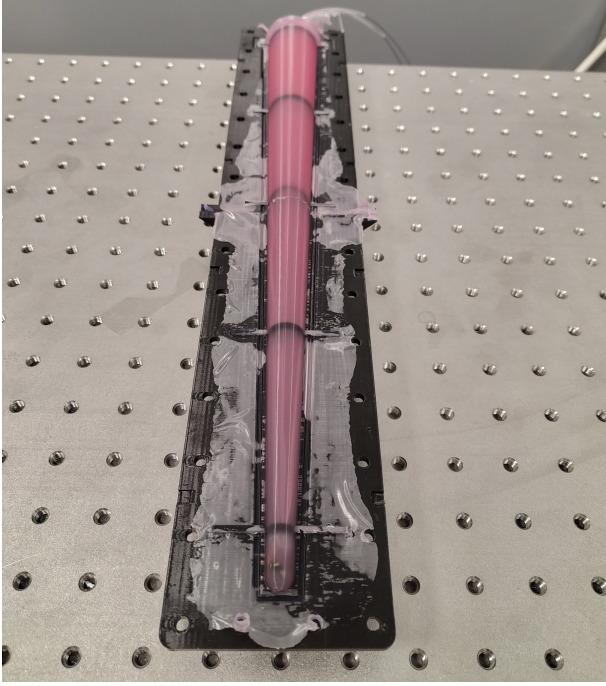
Opened mold after hardening showing the CSM before postprocessing
